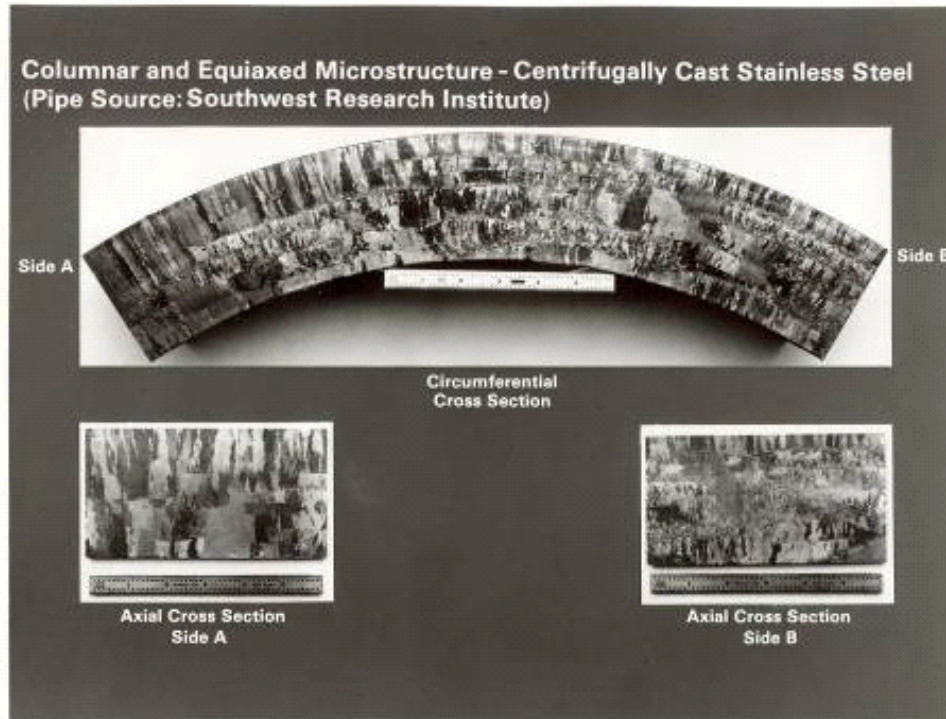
Circumferential and Axial Cross Sections of a Centrifugally Cast Stainless Steel Pipe Section Provided by Southwest Research Institute
